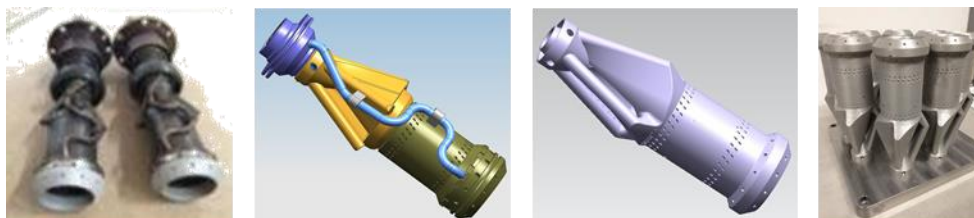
Fuel burner design progressions from welded (far left) to SLM additive manufacturing (far right) for 3rd generation DLE burner
